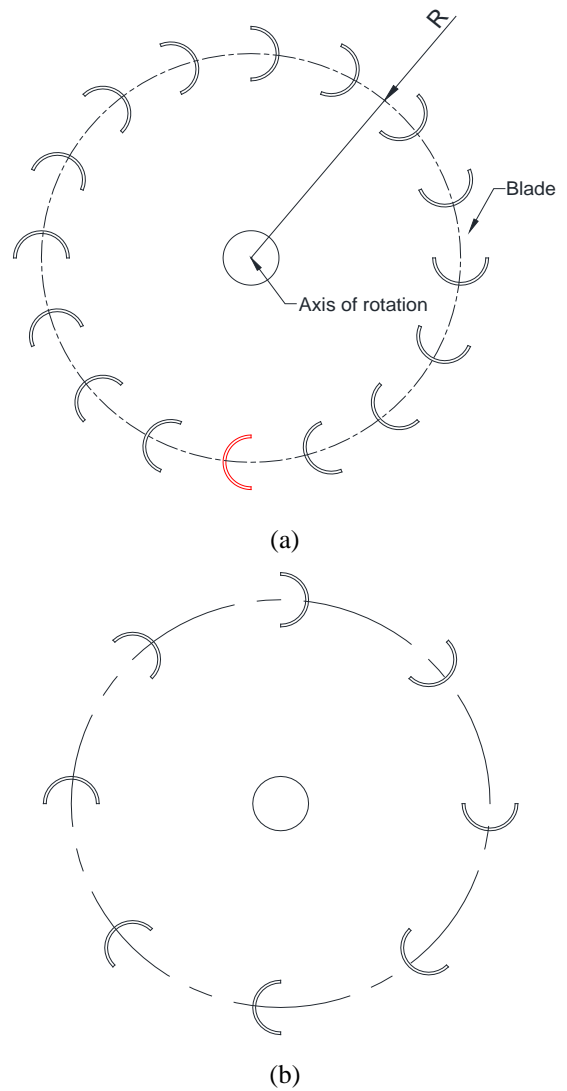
Top view of wind turbine rotors: (a) 16-bladed, (b) 8-bladed
